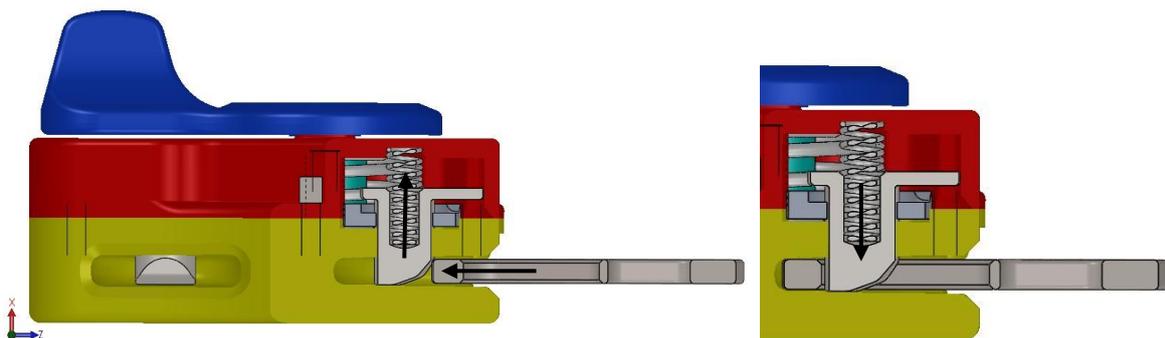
Buckle section to show latch-tongue coupling.
